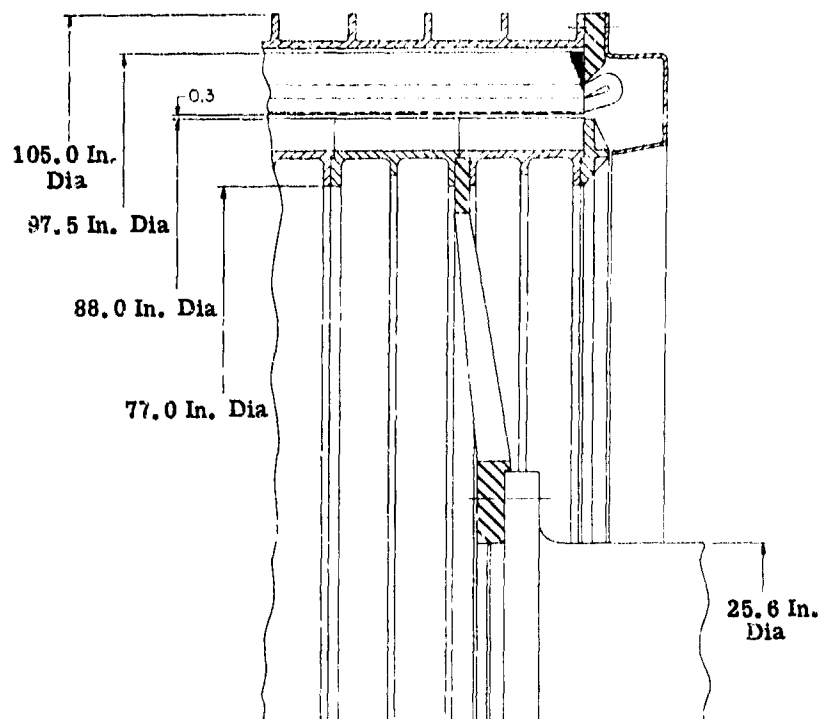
Detail of Rotor End of Permanent Magnet, 40 000-hp, 168-rpm Motor
